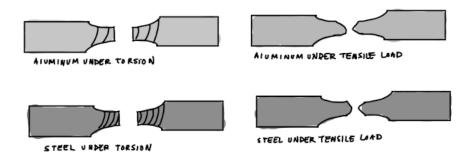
Drawing of Aluminum and Steel specimens under tensile and torsional loadings
